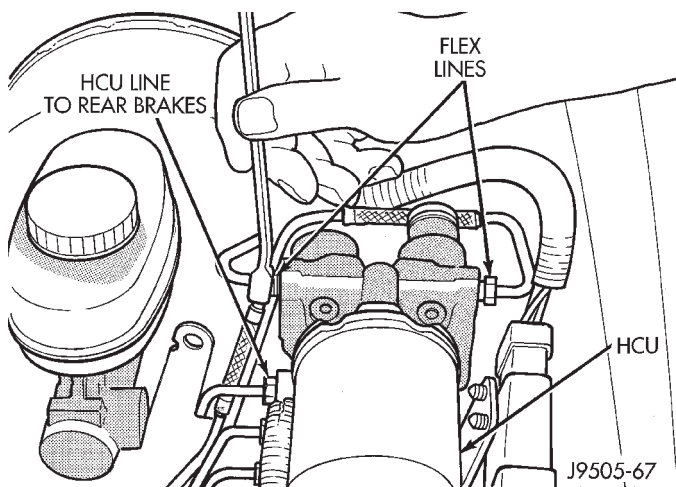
Location Of HCU Flexlines And HCU Line To Rear Brakes
